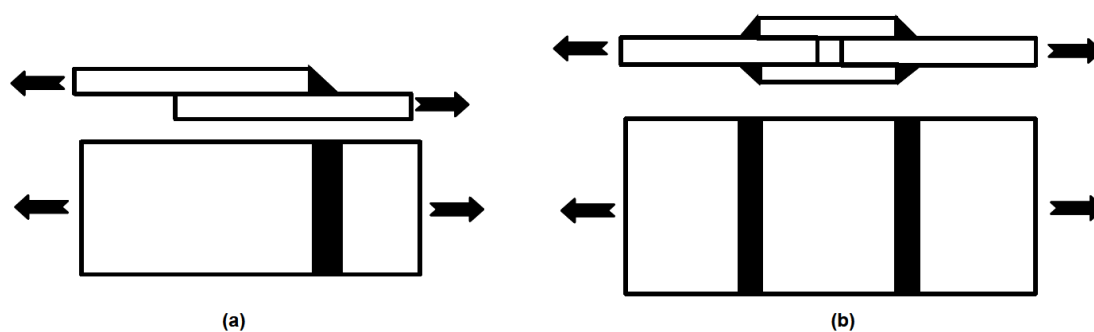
The transverse-fillet-weld-tension-shear specimens. Block arrows indicate loading direction, a) Single-lap configuration, b) Double-lap configuration (Khaled, 2005).
